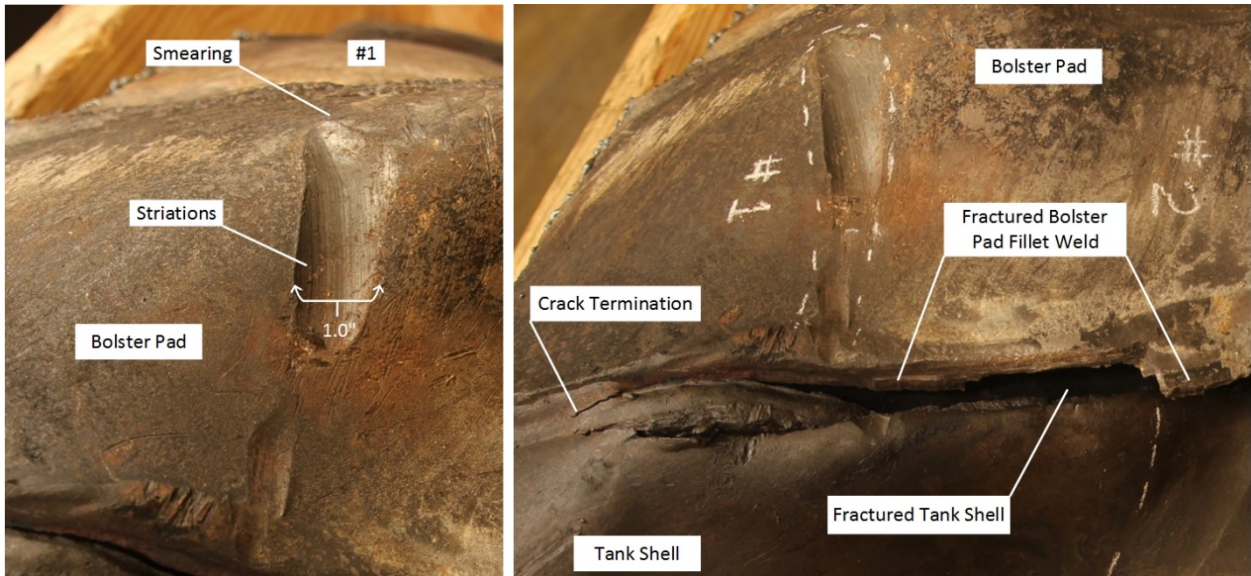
UTLX 209403 close view of gouge or wheel burn #1 across the lower portion of the bolster pad showing striations and metal flow (smearing) toward the A-end (left). The lower B-side termination of the shell crack is shown in the right photograph.
